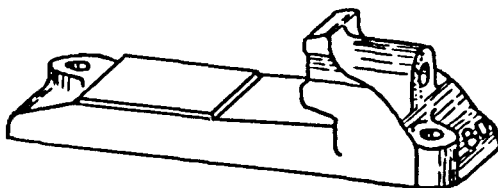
TYPICAL 60, 80 & 100 LB. COMMON HEEL CHAIR X & Y LAYOUT
